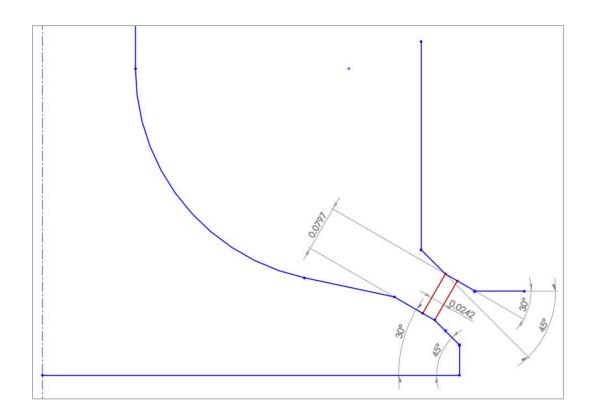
Drawing of the 45°(30°) valve and seat opened at 0.1 inches
